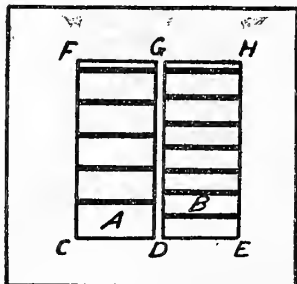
Test for parallelism of gage surfaces.  $B$  shorter at  $GH$  than  $DE$
